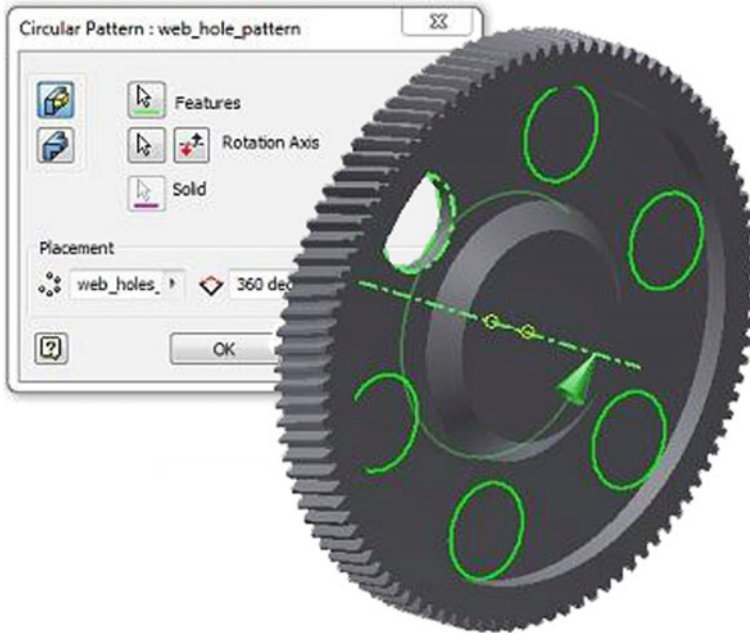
The modelling of reduction gear basic toothed wheel (Wheel 1)
